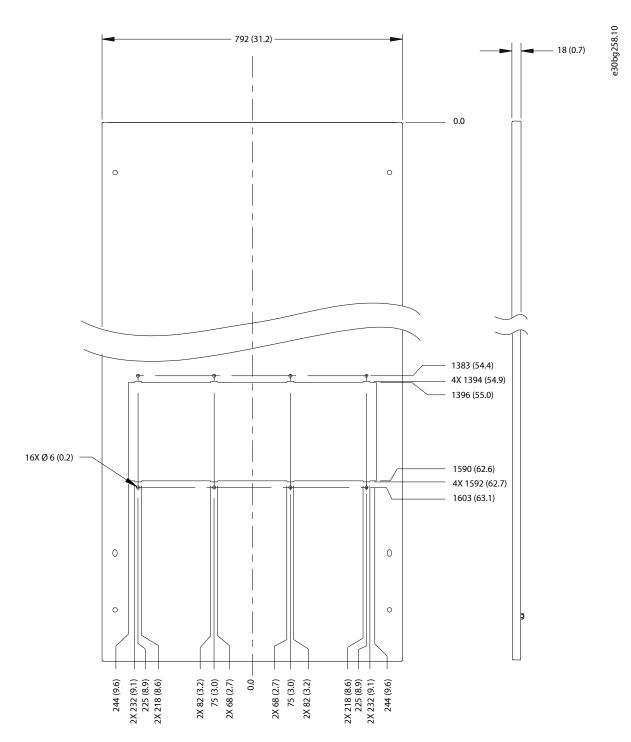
Vent Dimensions for Backplate in 800 mm (32 in) Cabinet
